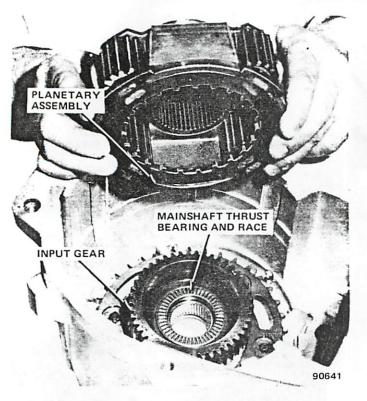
D-37 Input Gear, Mainshaft Thrust Bearing and Planetary Installation
